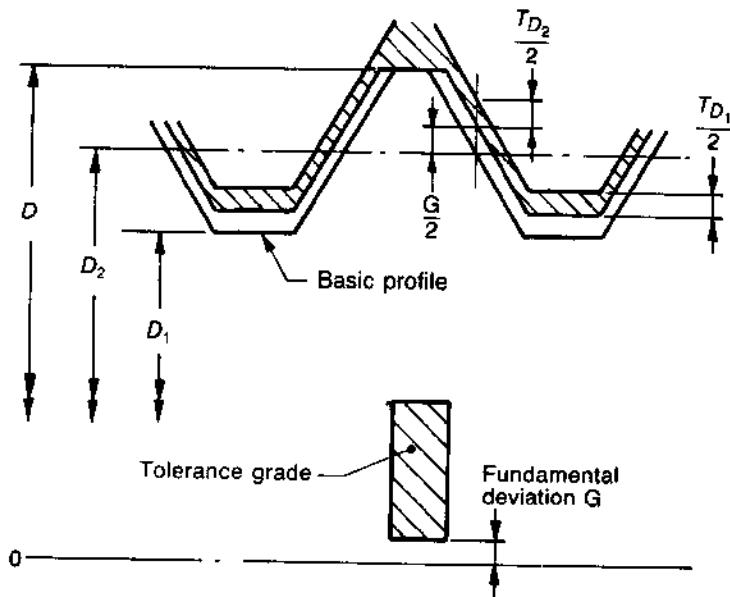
LIMITING PROFILES FOR INTERNAL THREADS—TOLERANCE POSITION G
